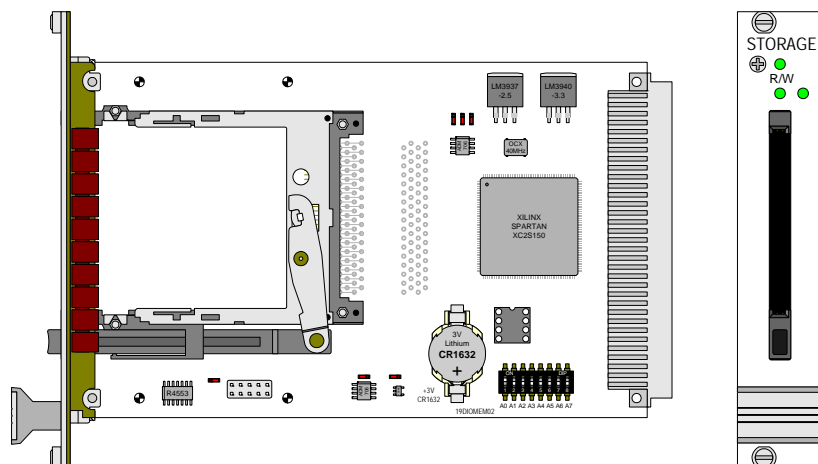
Pro-Storage: Printed circuit board and front panel
